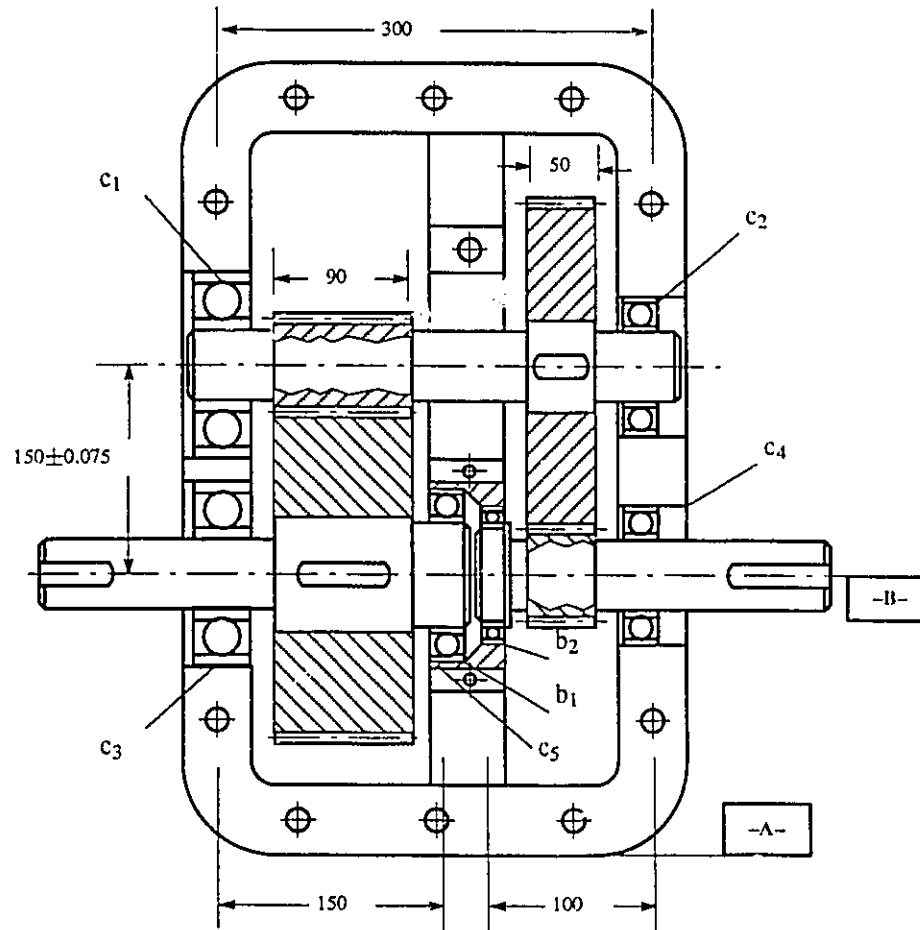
12 Example 2: (Dimensional Tolerances)
